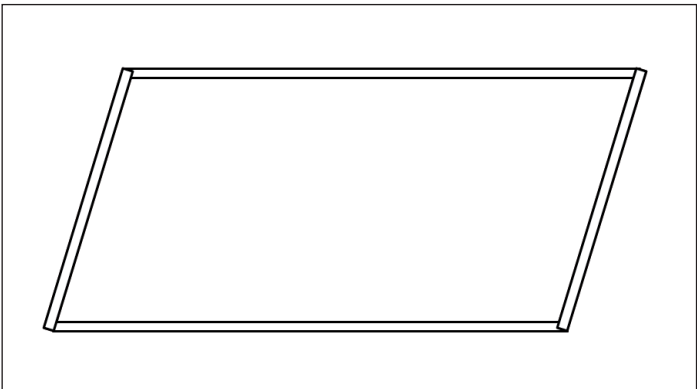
Diagonal distortion of the frame after welding
